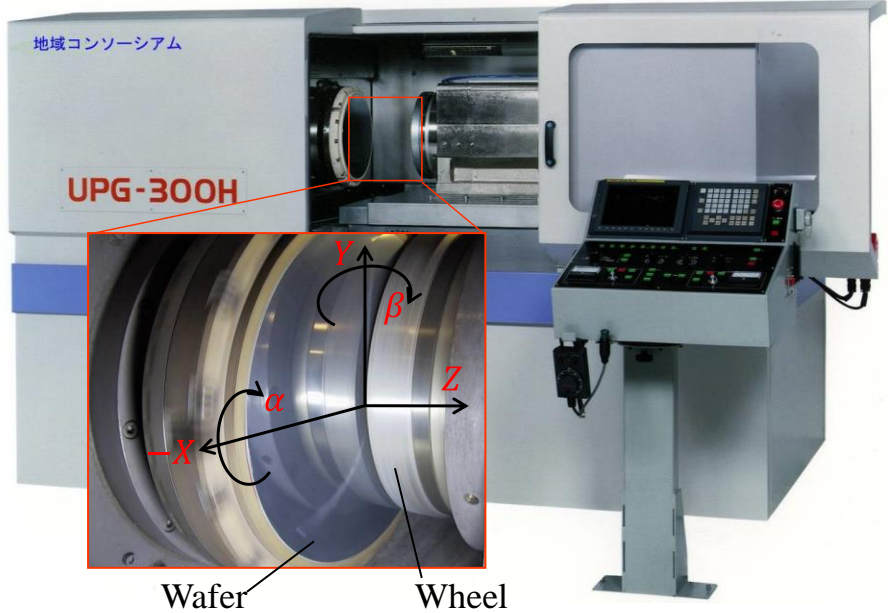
UPG-300H rotary in-feed grinding machine
